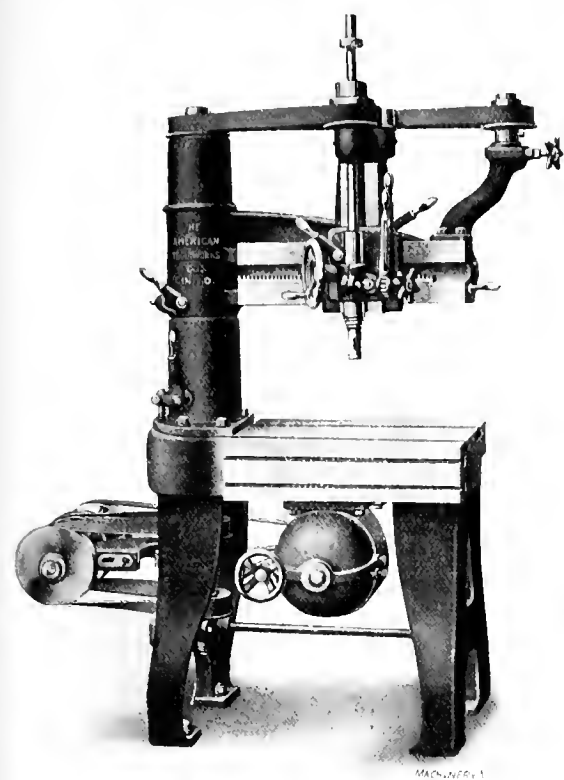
American Tool Works Co.'s 2-foot Radial Drill with Motor Drive
